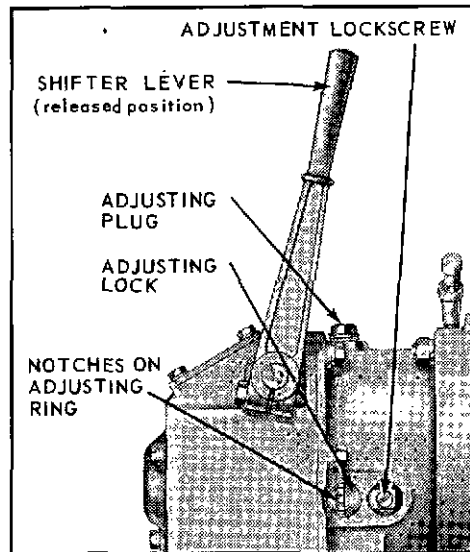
, CLUTCH REDUCTION ADJUSTMENT
